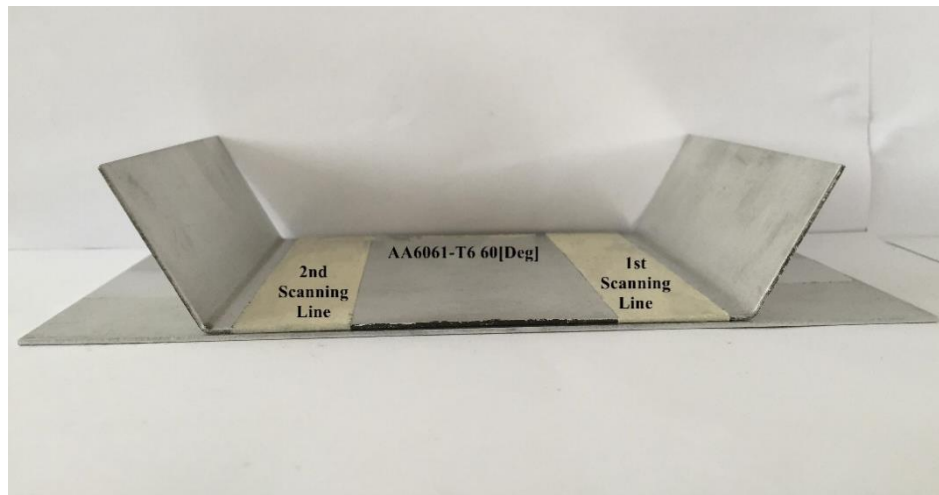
AA6061-T6 final formed “U” shape component with 60° bending angle
